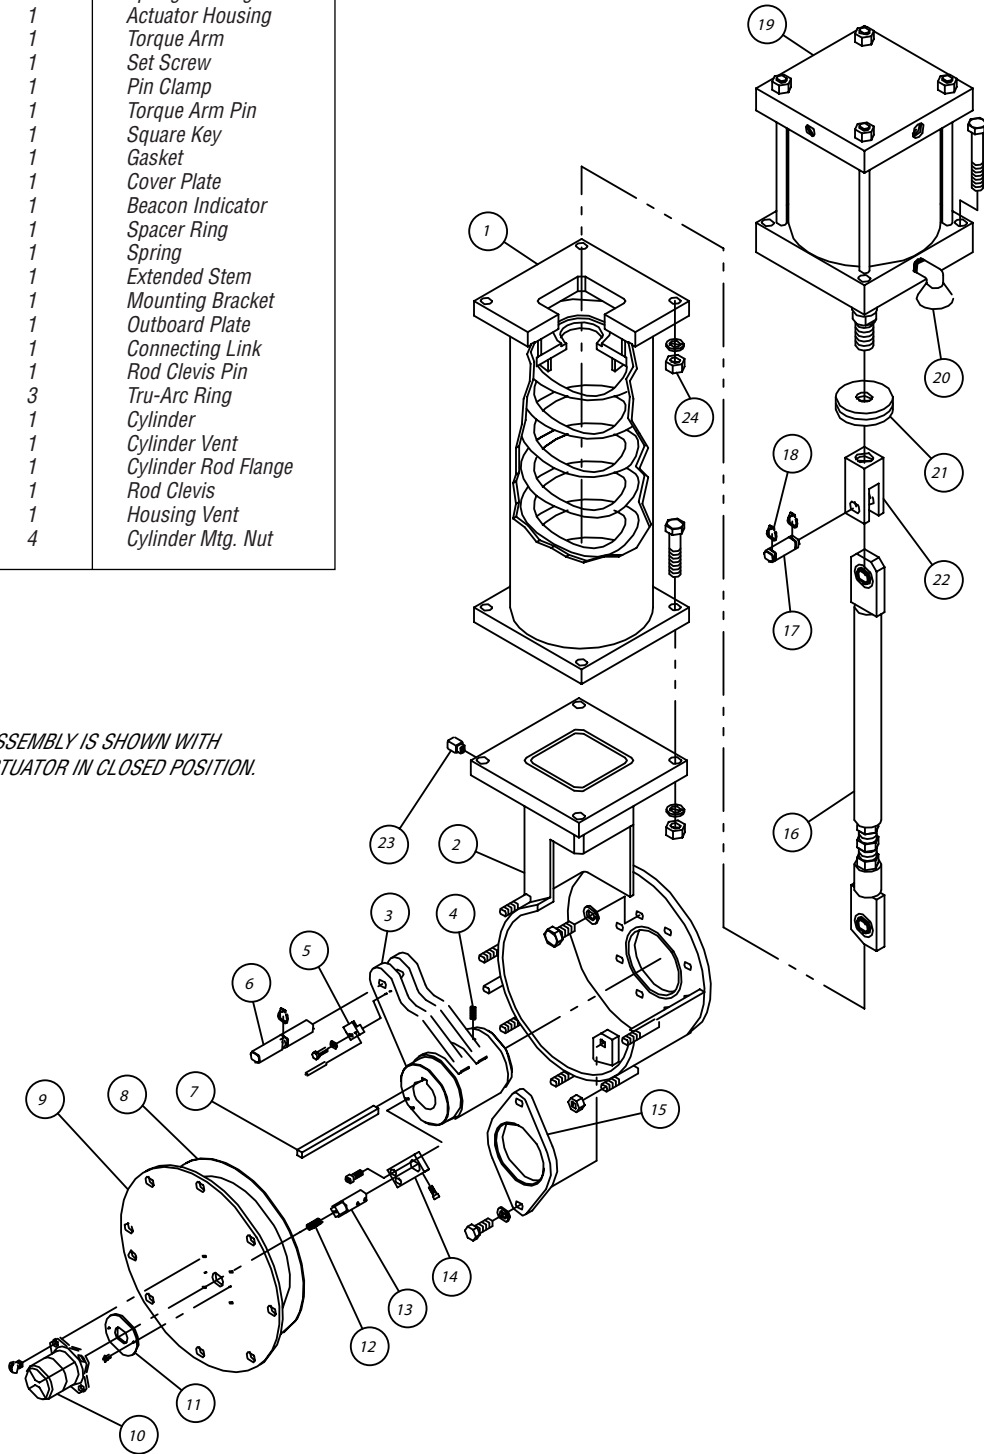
Above Grade Spring Return Actuator (Fail Open)
